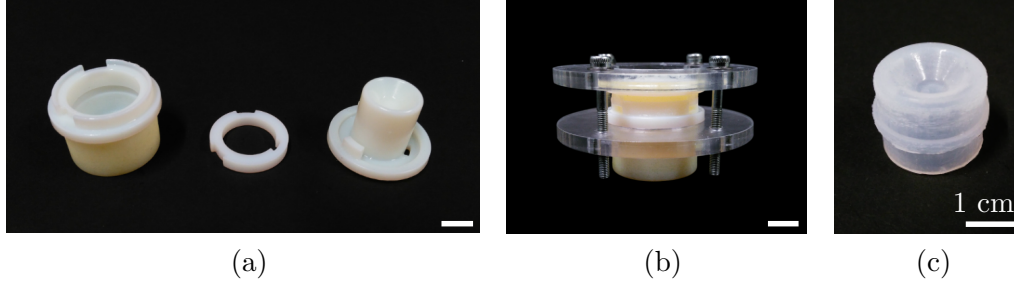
(a) Individual printed mould parts and (b) assembled mould to manufacture (c) the disc spring EIA prototype
